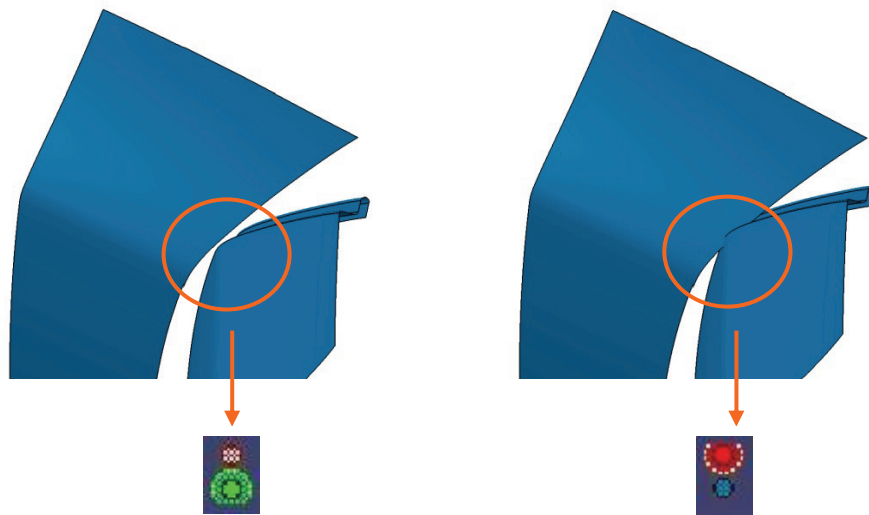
Check door hang out: LH: door hang out possible, RH: door hang out not possible
